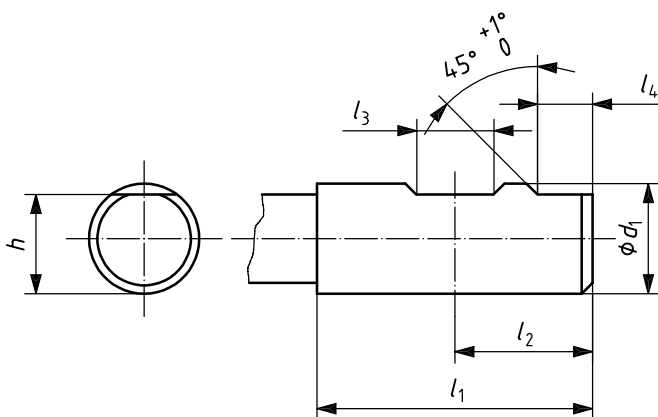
WE form — Flatted cylindrical shanks with double flat
